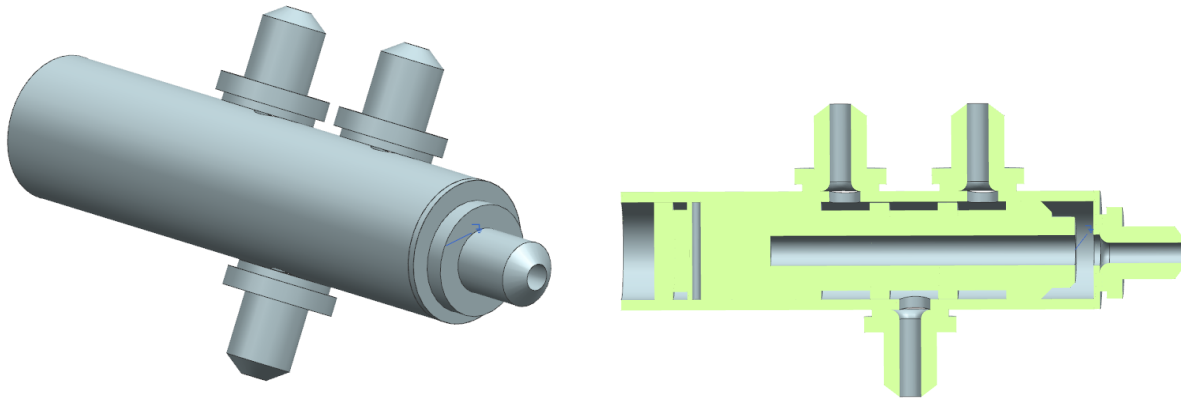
Cam phaser oil supply bearing and oil passages.
